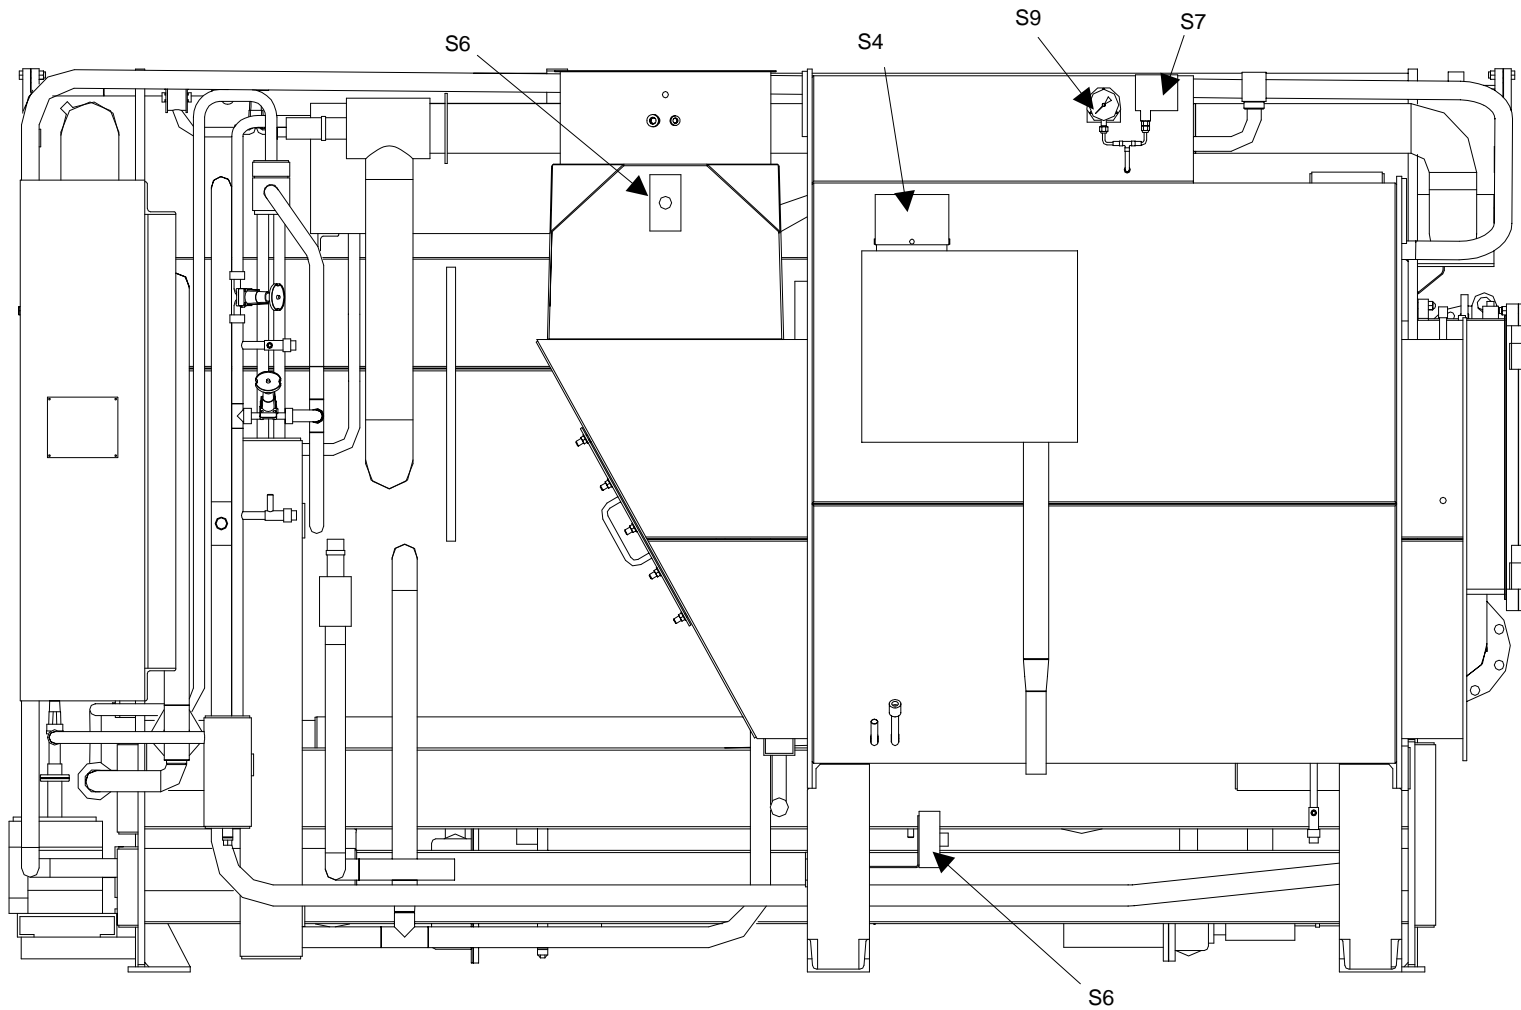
Switches Location, Side View (16DNP018 Liquid tube type chiller)
